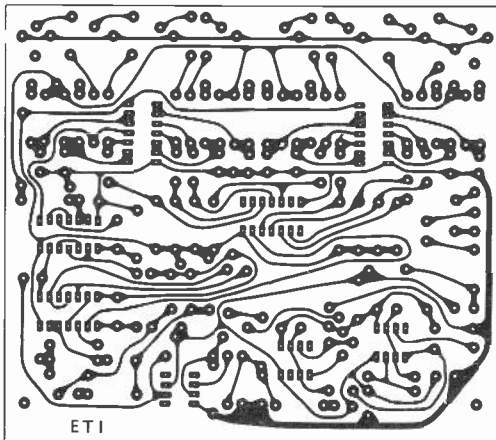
PCB foil pattern of A board shown full size (130 x 115mm)
